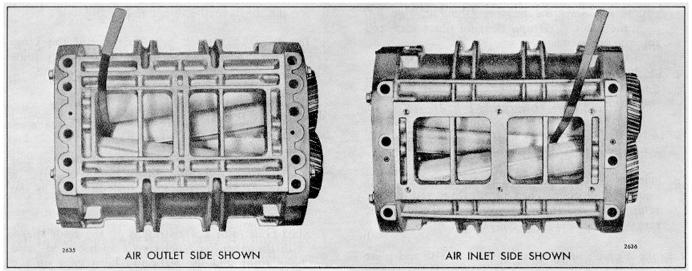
Measuring "CC" and "C" Clearance Between Blower Rotor Lobes
